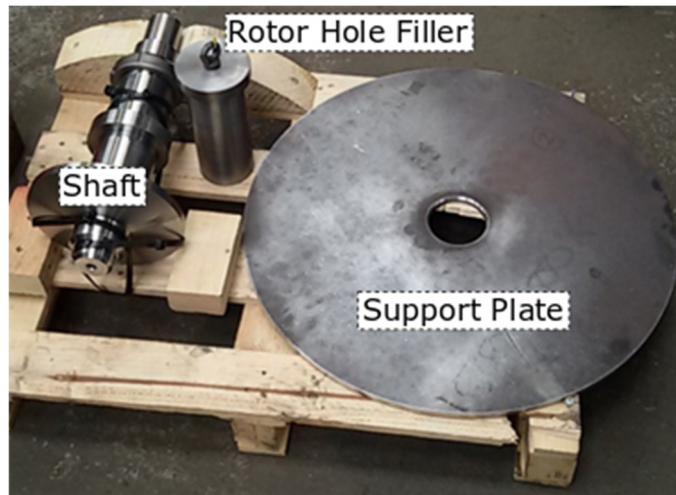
2 SRFLY rotor assembly components: shaft, rotor hole filler and support plate.
